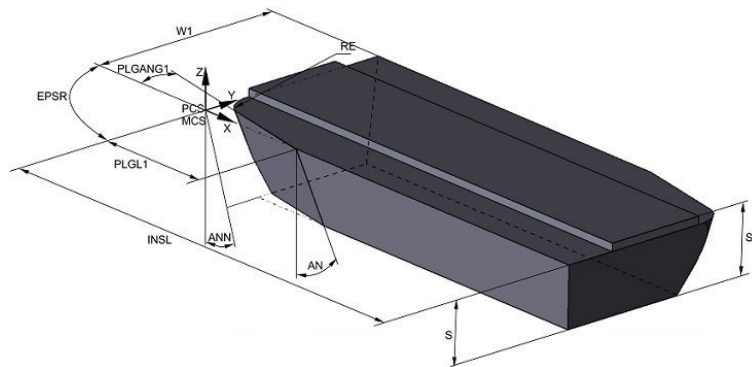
Geometry of a reaming insert with two cutting edges and rounded plug chamfer
